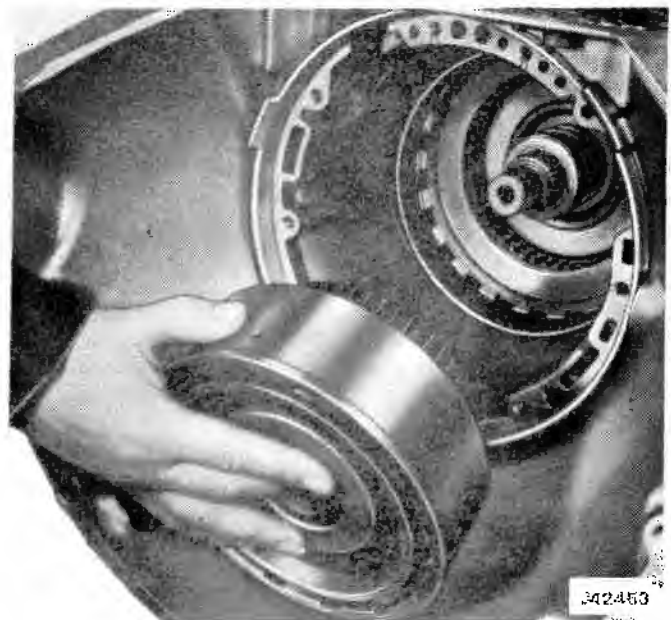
Removing-Installing Direct Clutch Assembly
